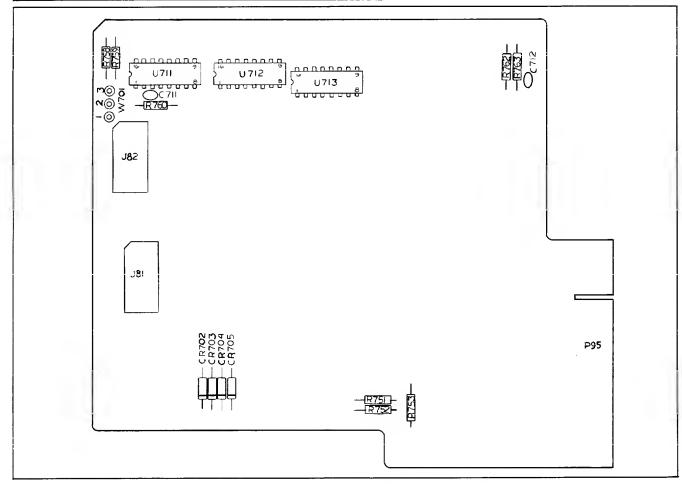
A10 Basic Remote Control Unit PCB Assembly
